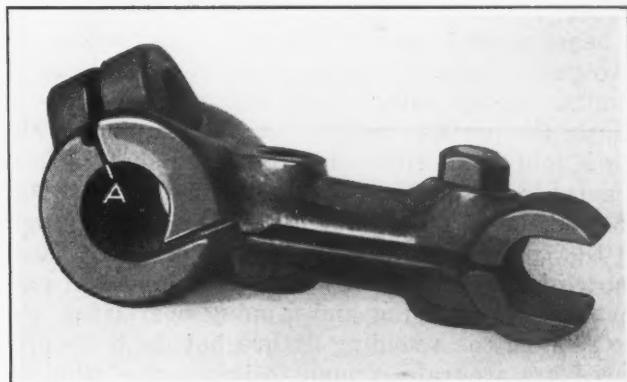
Lever Made in Two Pieces to Permit Assembling on Shaft Without Removing Shaft
